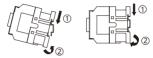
Installation and disassemble method of CJX2s/CJX2i-09~38
